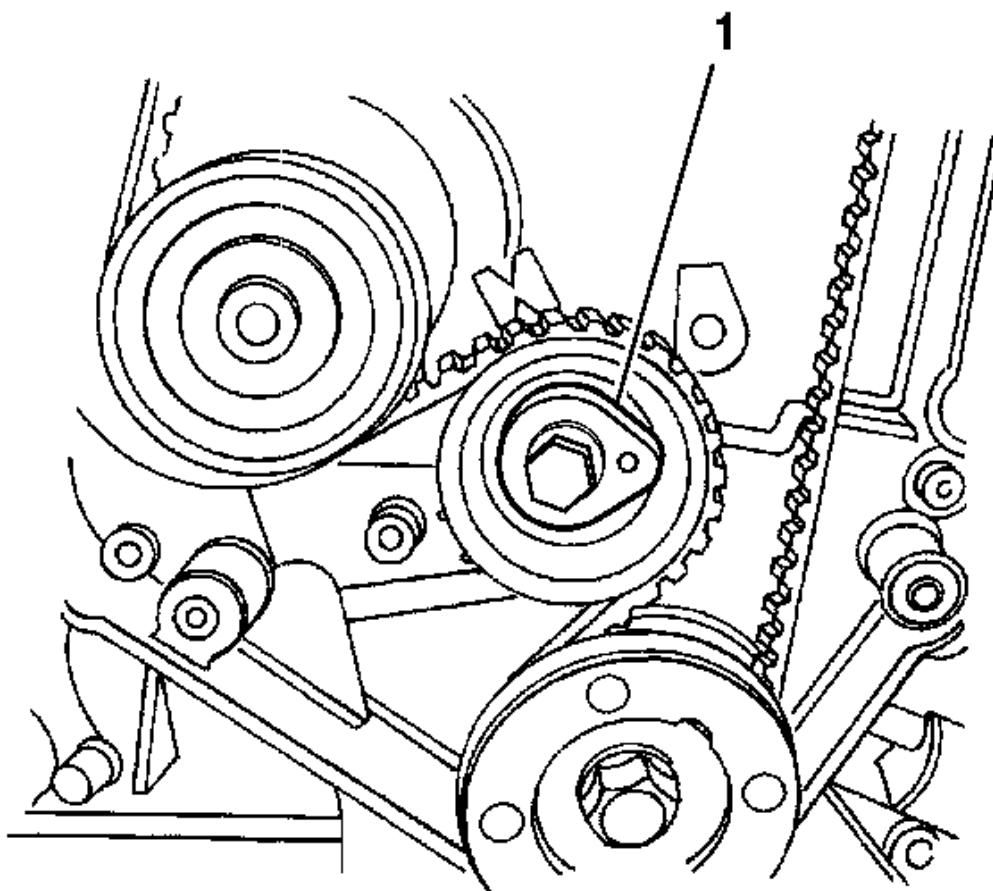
View Of Automatic Tensioner And Hex-Key Tab
